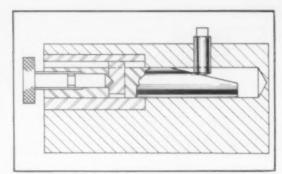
(top left) illustrates an inexpensive adjustable stop produced by using the head of a setscrew. Fig. 5 (top center) provides a solution where additional support must be used. This adjustable support incorporates a Jackscrew with a knurled shoulder which can be operated by hand. The wedge jack, shown in Fig. 6 (top right) is another method of providing additional support in hard-to-reach places. Fig. 7 (at right) illustrates a corner drive for a jackscrew for use where the added support can be reached only by turning one or seval corners. Fig. 8 (right center) shows location procedure for a shaft. Shaft is placed in V-block; two dowels insure accuracy.
